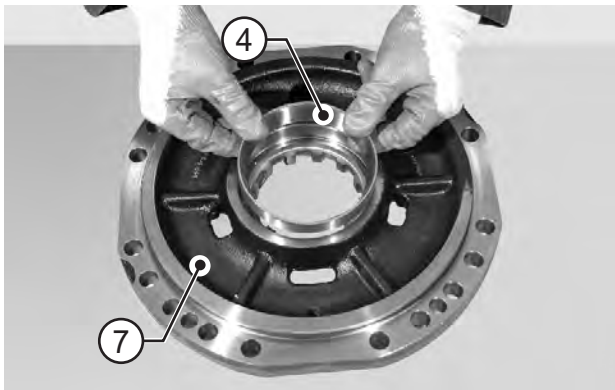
Only if bearings are replaced: Insert the thrust blocks of the bearings (4) into the intermediate covers (7).
